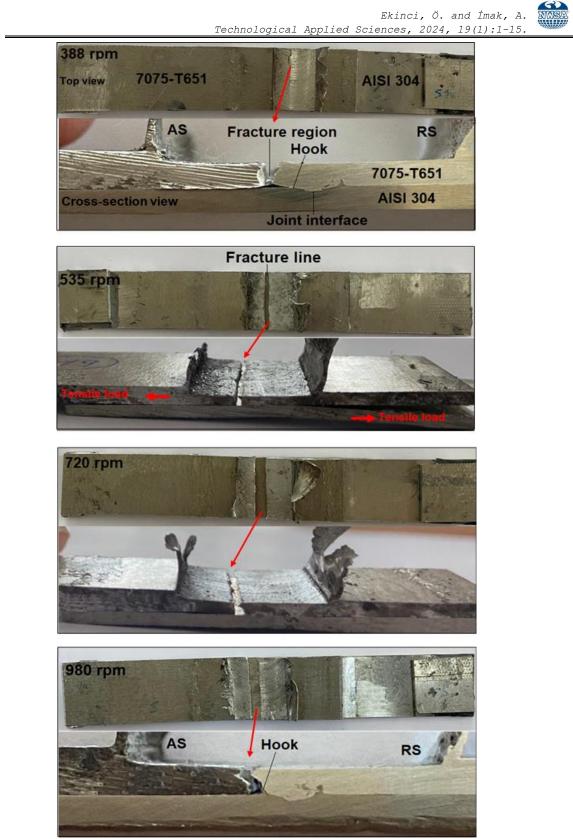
The lap joint samples broken after the tensile shear test and their cross-sectional view
